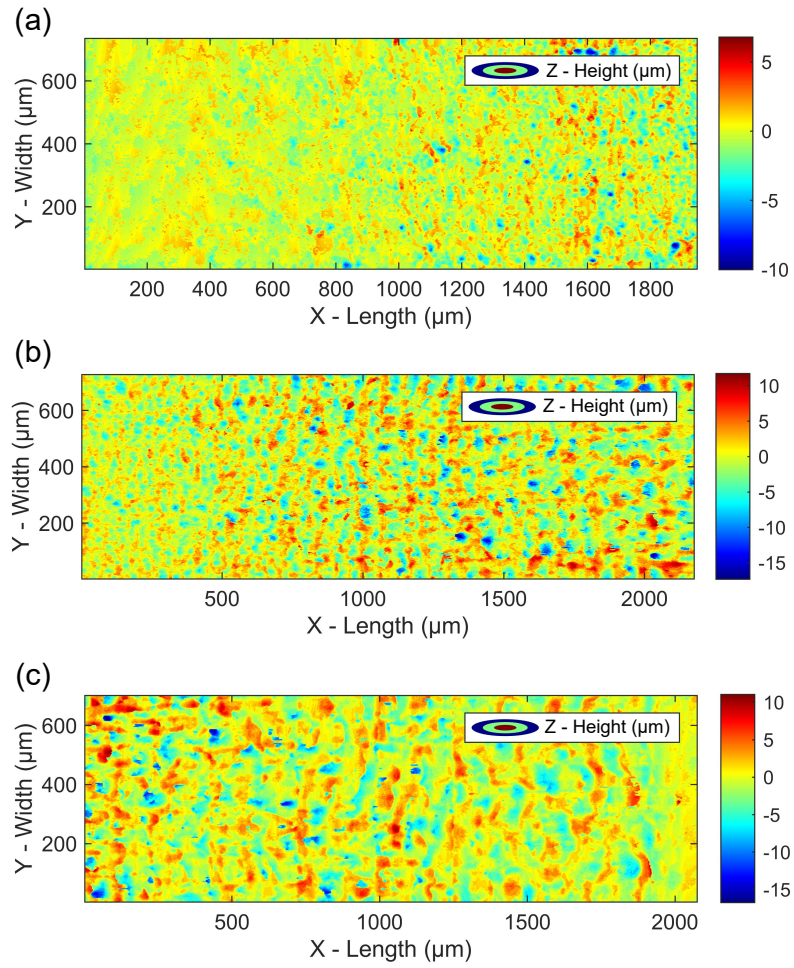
Maximum height maps for Al/Cu interface of sample D - (a) Begin of welding - (b) Center of welding - (c) End of welding
